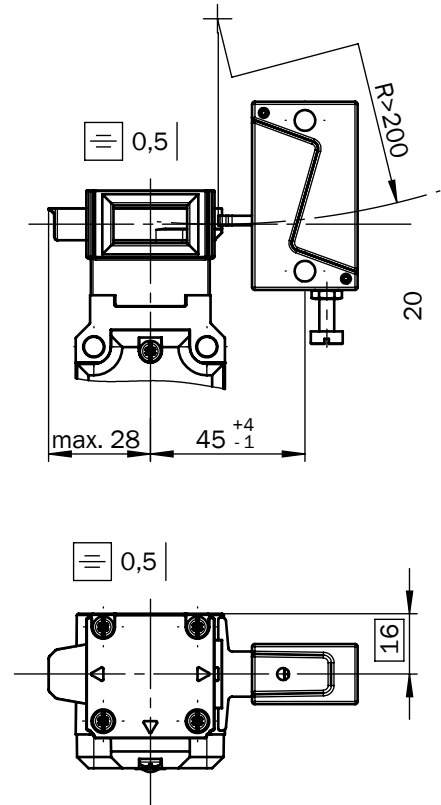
Min. door radii for TR110-XAFT hinged actuator (mm)
